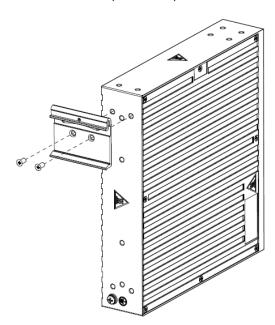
DIN Rail Mounting Option 1: Attach the Bracket
